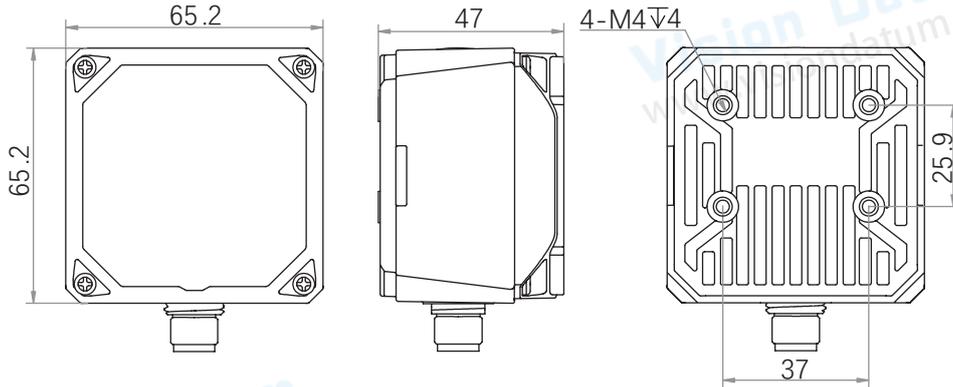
65.2 × 65.2 × 47 mm Mechanical Dimensions (in mm) of the Smart Cameras with M12-Monut housing (The installation uses M4 screws).
